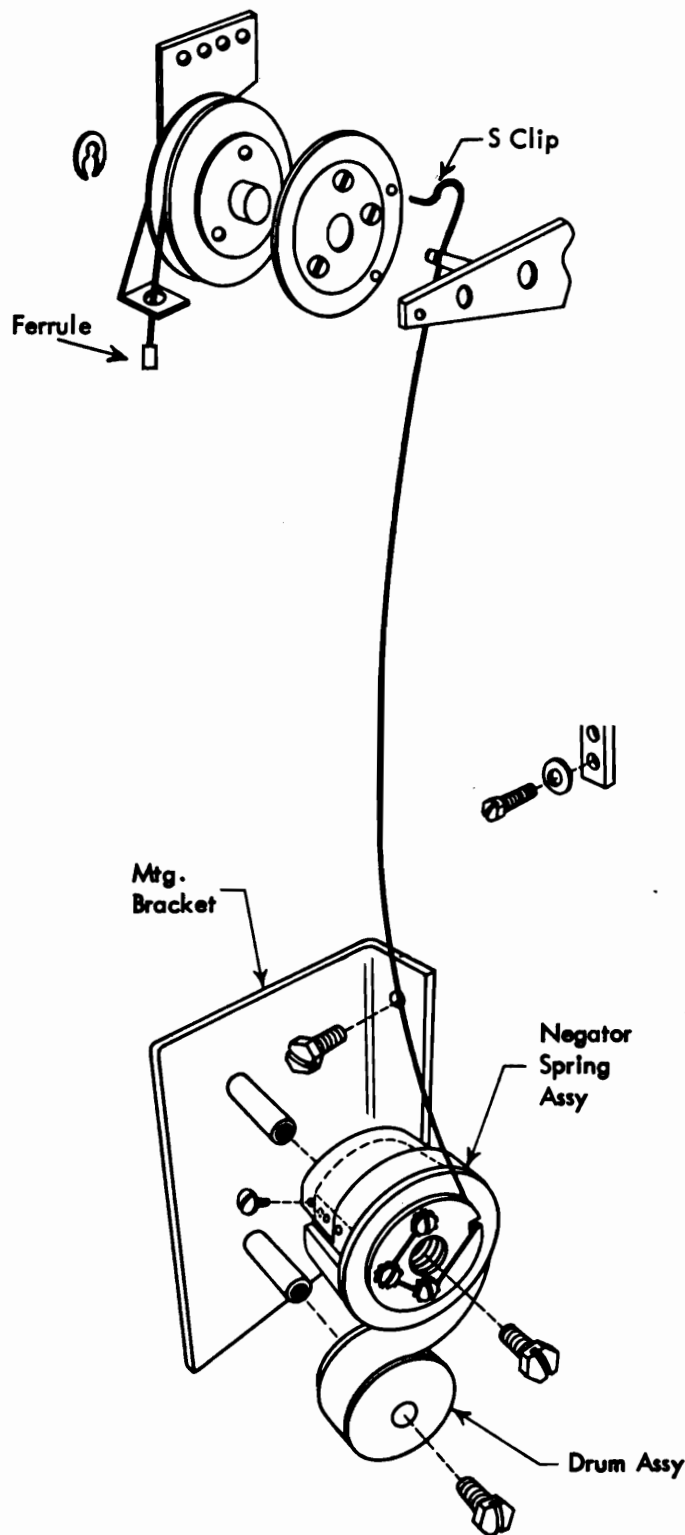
Sliding Drum Spring Drum Pulley Assembly
